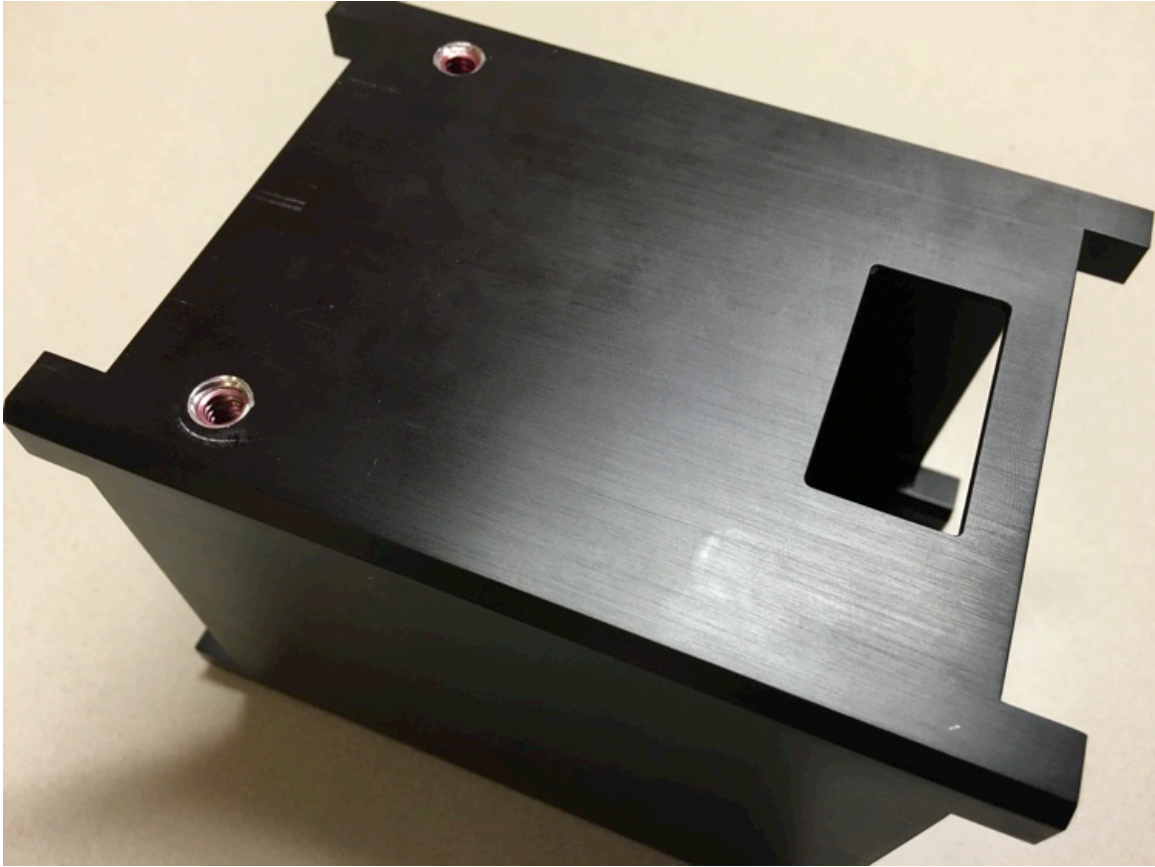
The infrared camera structure, with bottom face pointing up, shows the maroon locking helicoil inserts that lock the 1/4"-20 bolts from the bottom plate of the spacecraft structure.
